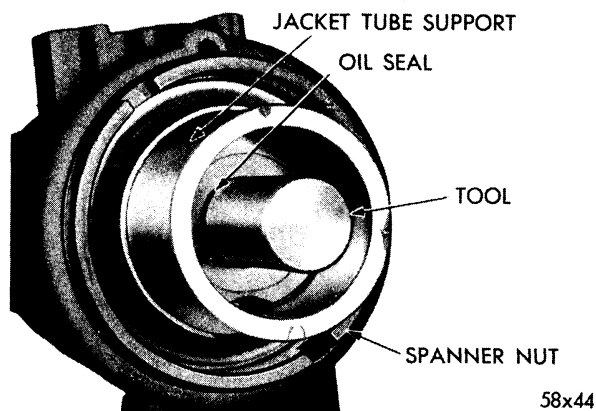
Installing Worm Shaft Upper Oil Seal with Tool C-3650
